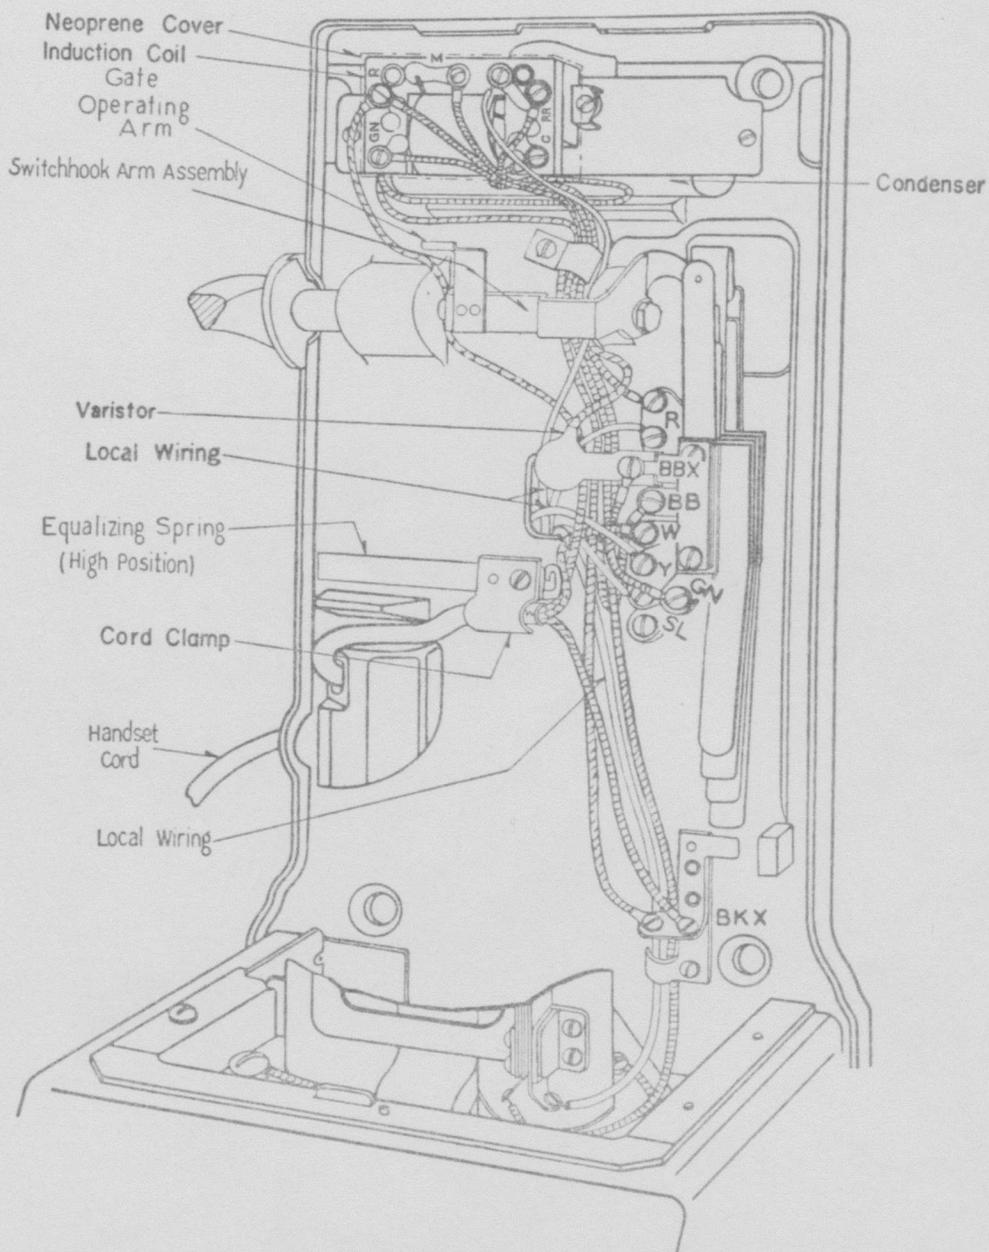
191, 195, 196, or 197-type Coin Collector—Lower Housing and Backplate Assembly
